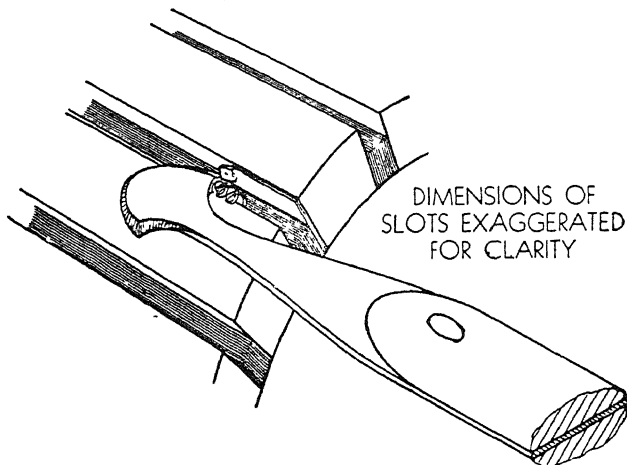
Illustrating removal of mica fins and chamfering edge of commutator bar with home made tool.
